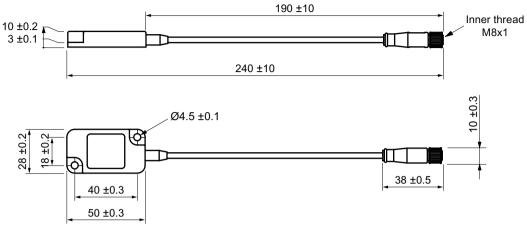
Dimension drawing ANT 3 (all values in mm)
